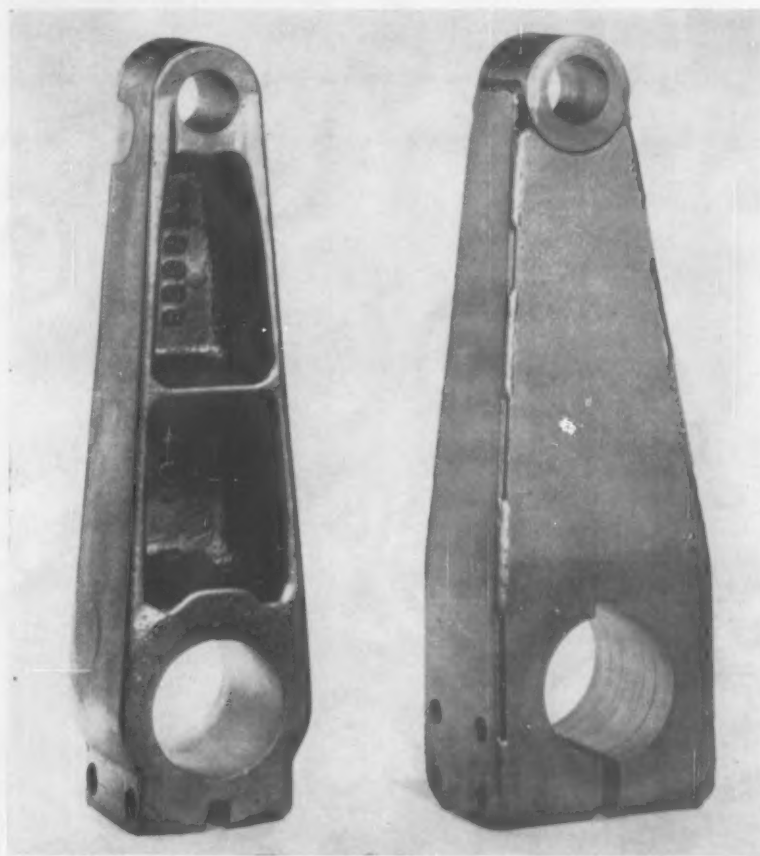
Welded crank arm was redesigned for nodular iron, shell mold.
